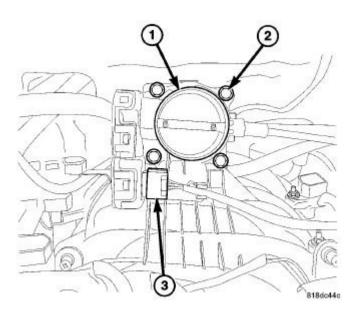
THROTTLE BODY 3.7L Courtesy of CHRYSLER LLC
